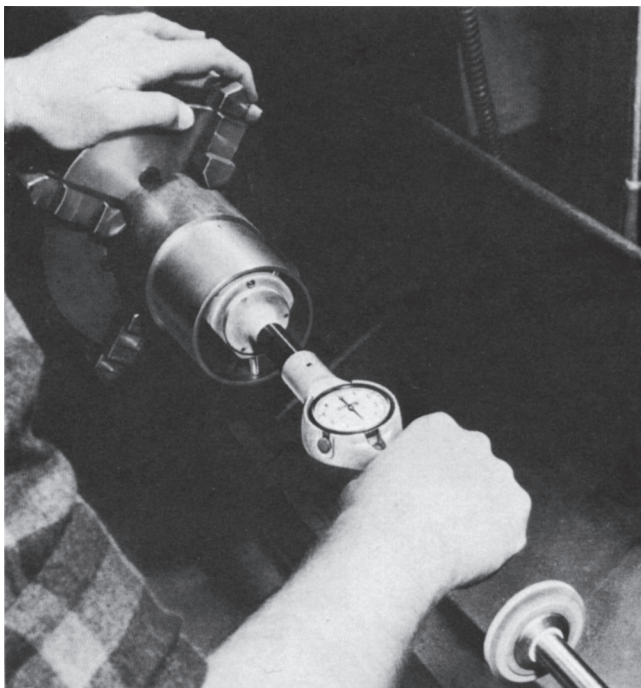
Using the dial bore gage (Courtesy The L.S. Starrett Co.).
